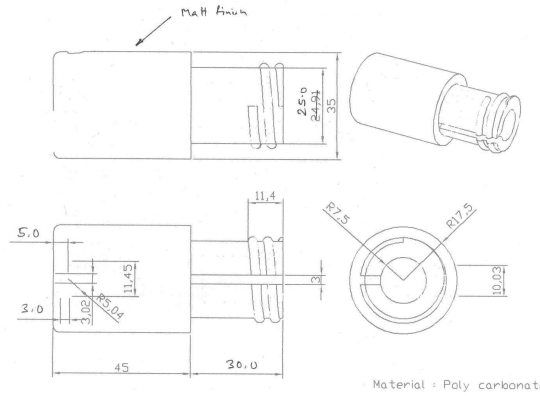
Final drawing of one component of the 'handle' in the detailed design stage.
